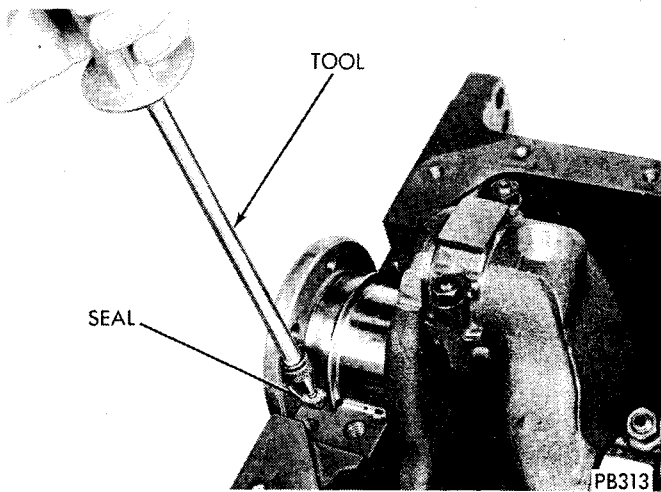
Removing Upper Oil Seal With Tool C-4148
